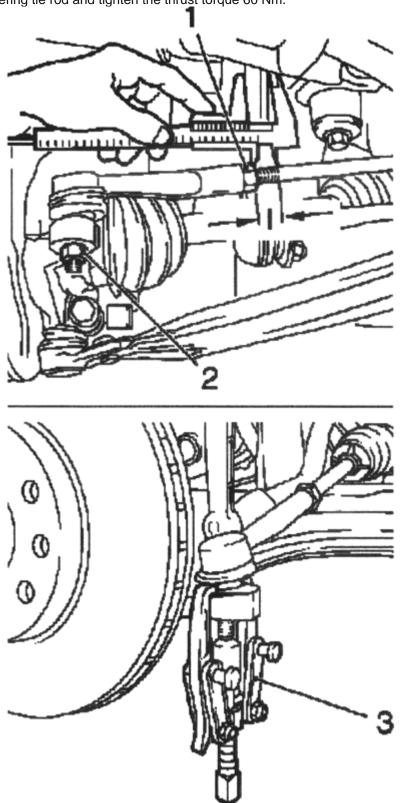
Measurement length thread of nuts to threaded end NACO-nechnika steering traction and spew NACO-nechnika steering draft:
